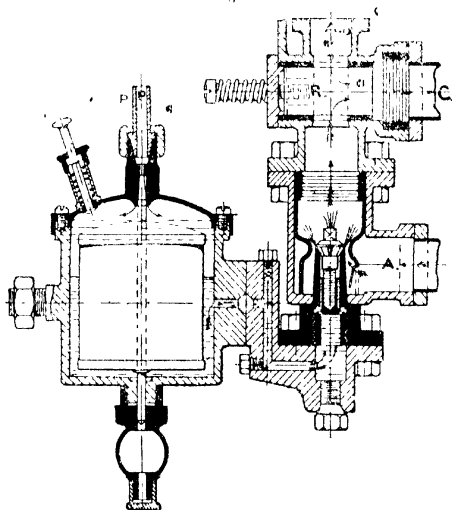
Multiple jet carburettor with combined supplementary air and mixture plug throttle—Longemare
